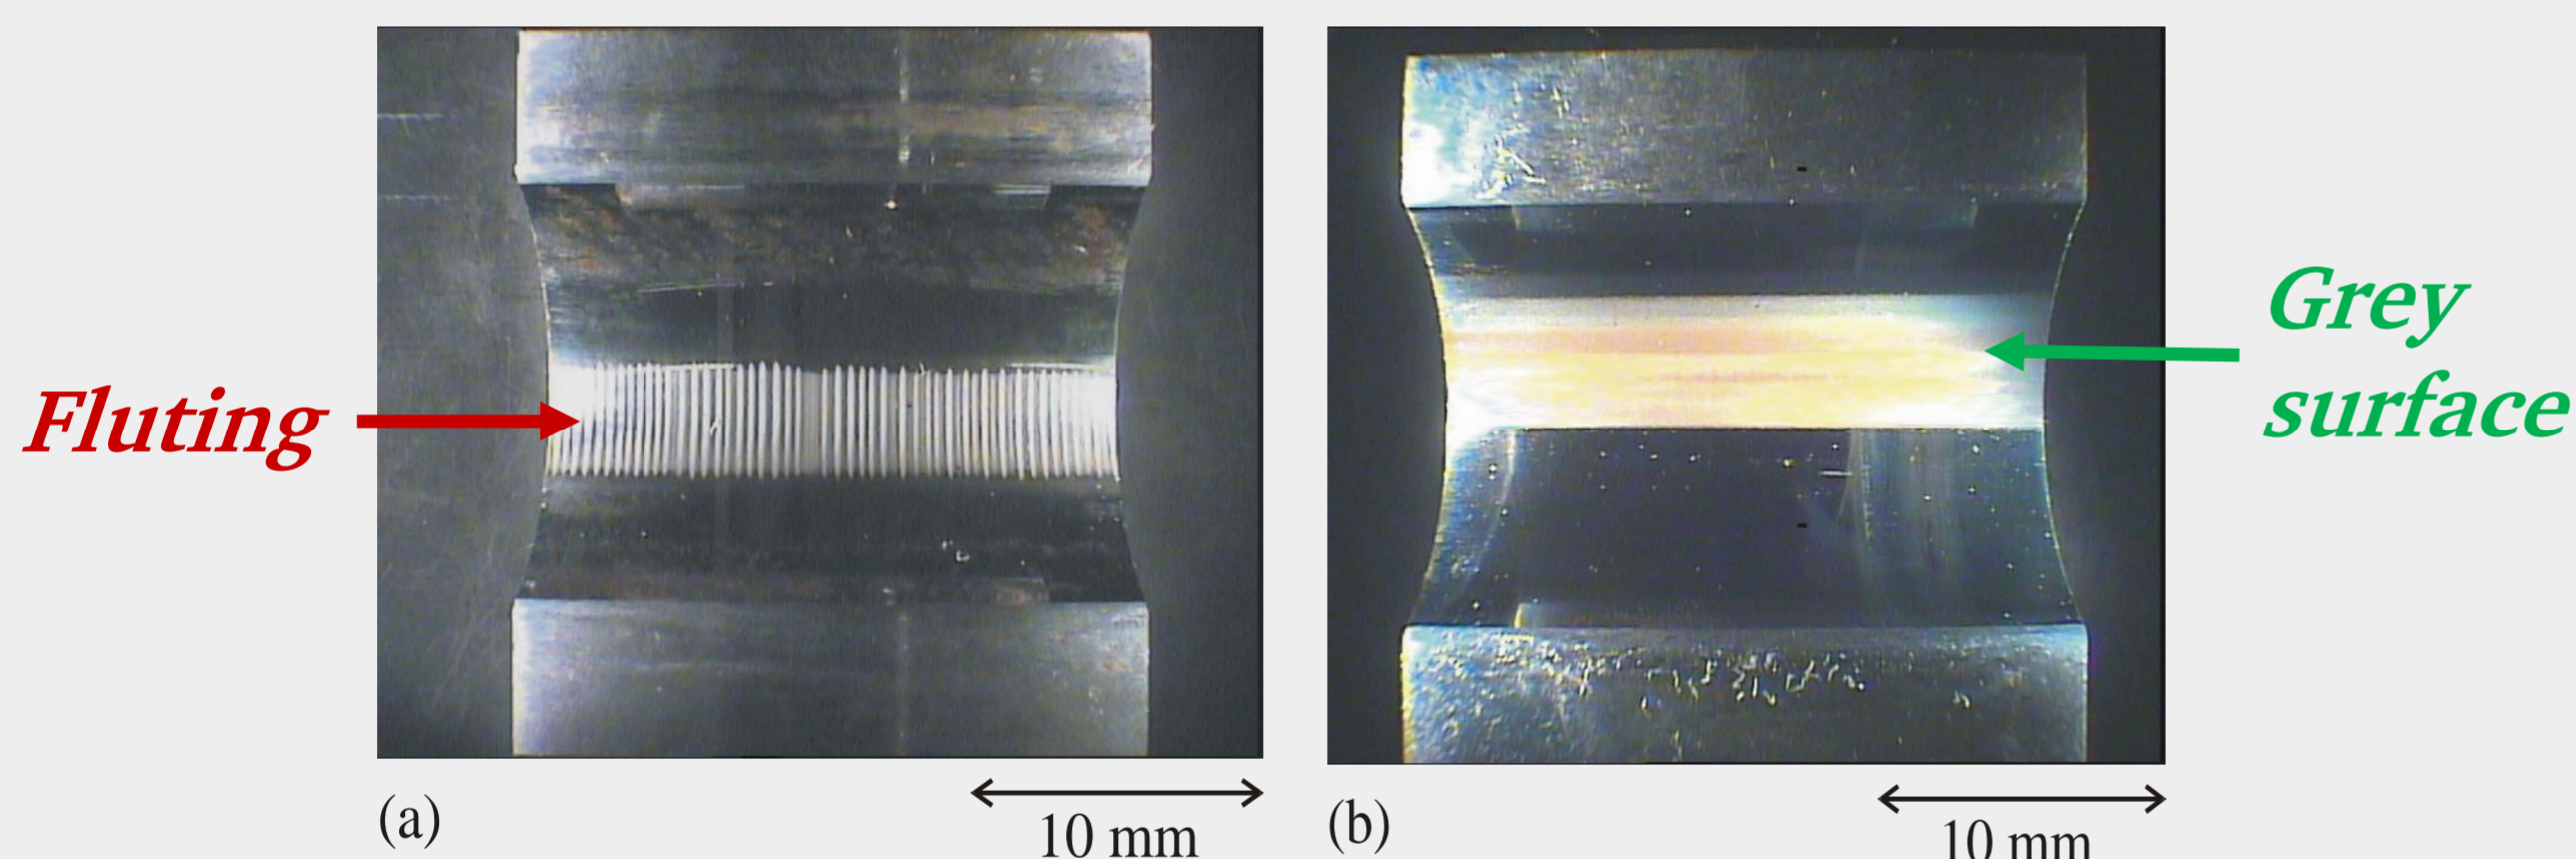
Bearing Damage Inner race of a ball bearing type 6309 C3 (Siemens) 11 kW - induction motor, 10 kHz - inverter switching frequency, 1275 operating hours, 1500/min, no-load
